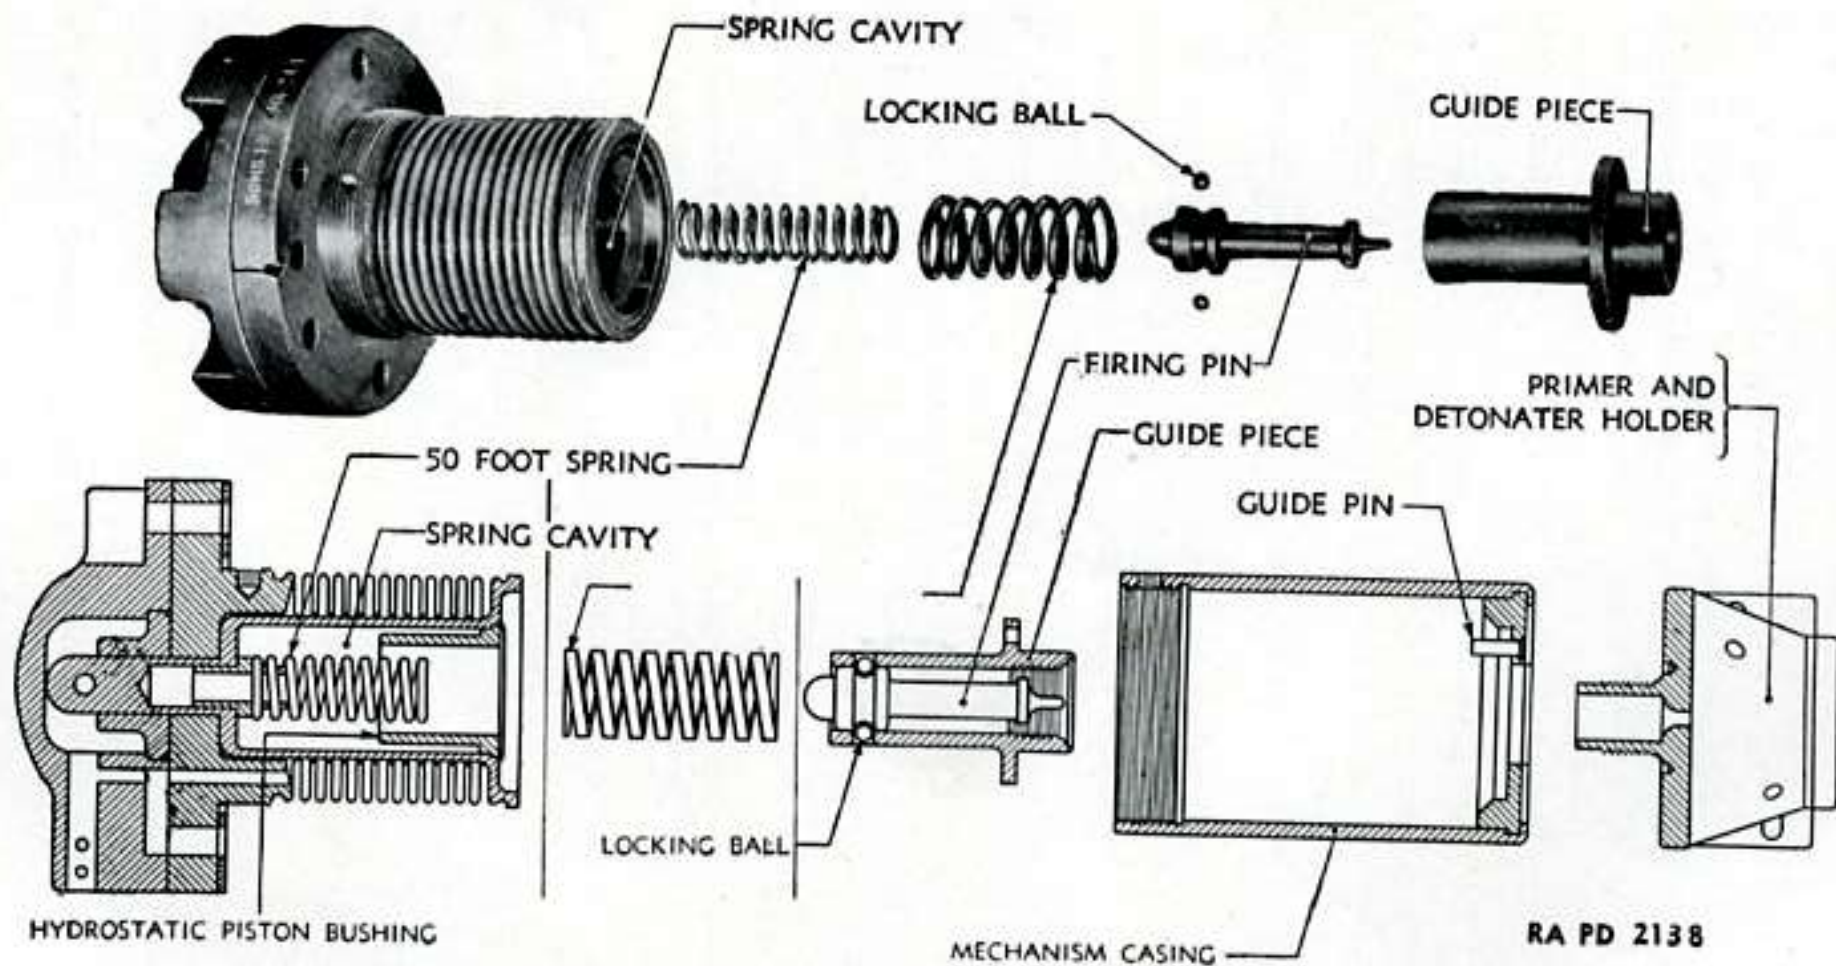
FUZE, bomb, hydrostatic, AN-MK. 224—diagram of assembly of pistol.
